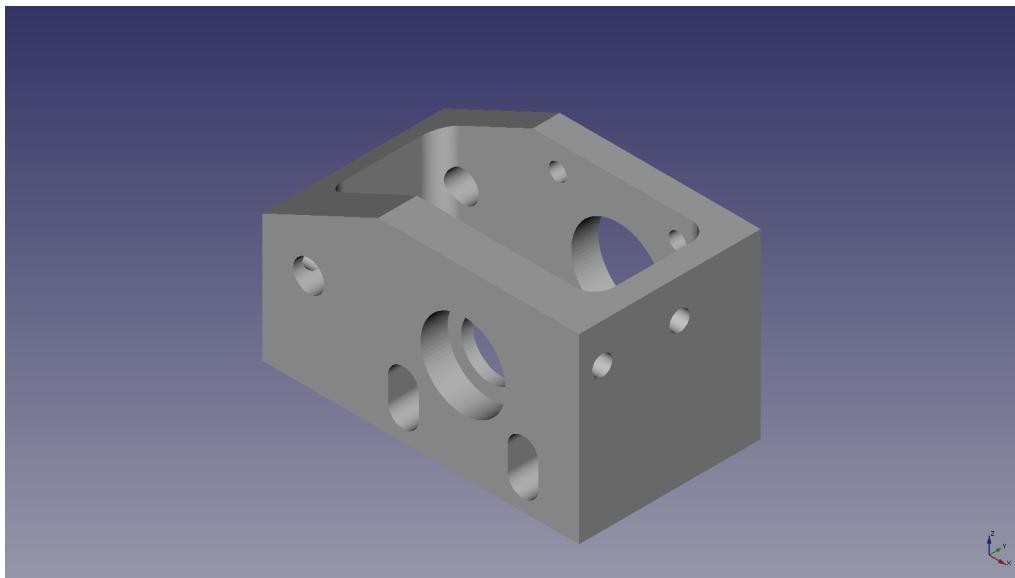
Begonia 3D Printed Lower Z Right Render
